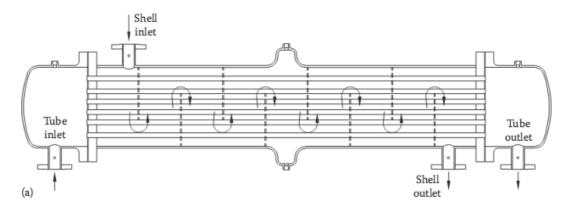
Cross-section drawing of a shell-and-tube exchanger with vertical baffles. (Thulukkanam, 2013)
